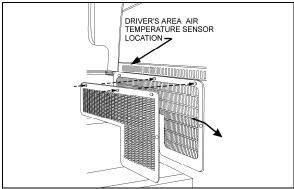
DRIVER'S SECTION ACCESS GRILL
